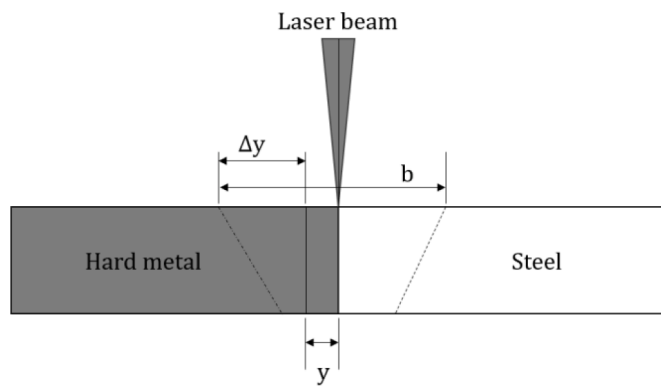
Welding configuration (Schiry and Plapper, 2019).
